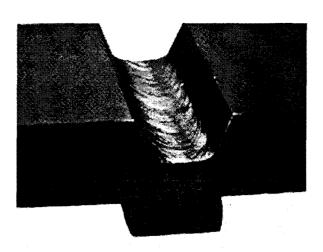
Proper Cleaning Between Weld Passes
